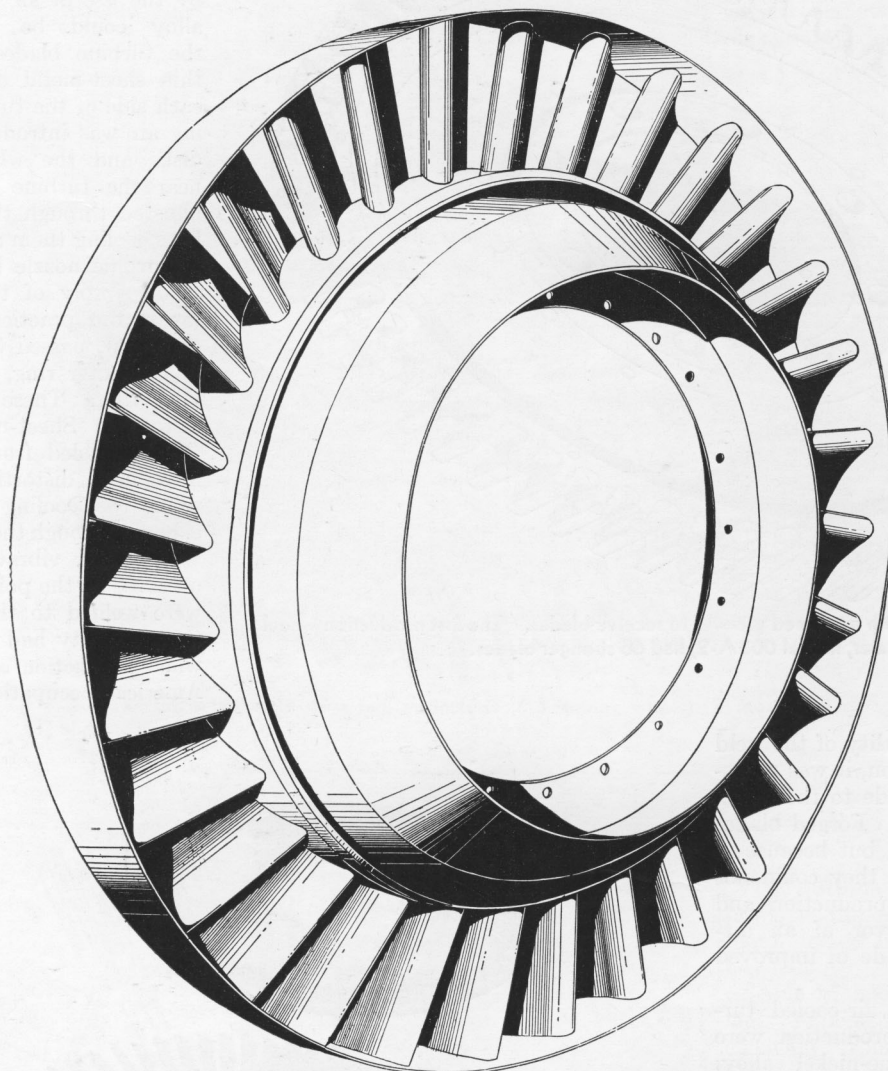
Front view of the BMW nozzle guide vane assembly.
